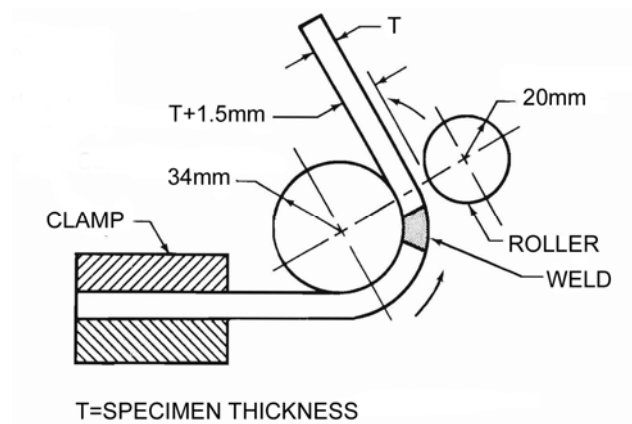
Alternative wrap-around guided bend fixture [62].
